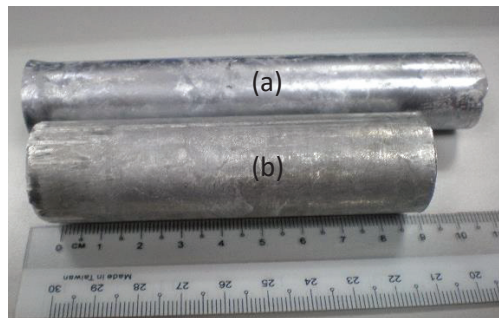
The aluminium MMC billet produced by: (a) mechanical stirring casting and (b) thixoforming process
